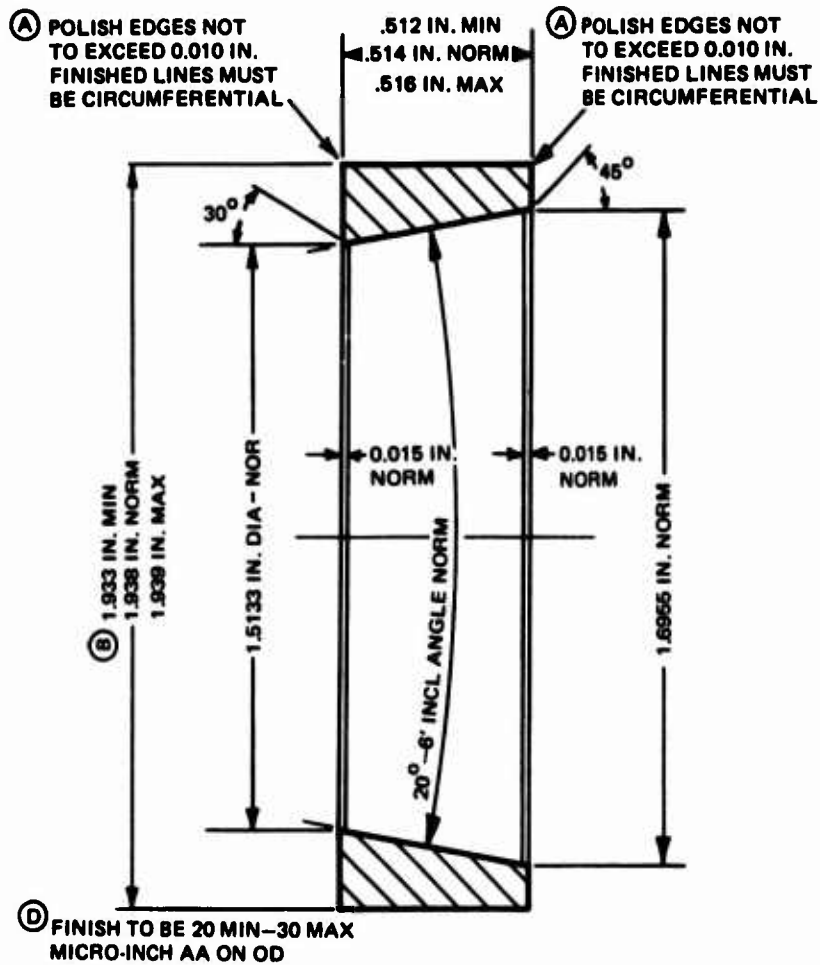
Test Cup for Timken Lubricant and Wear Test Machine.
